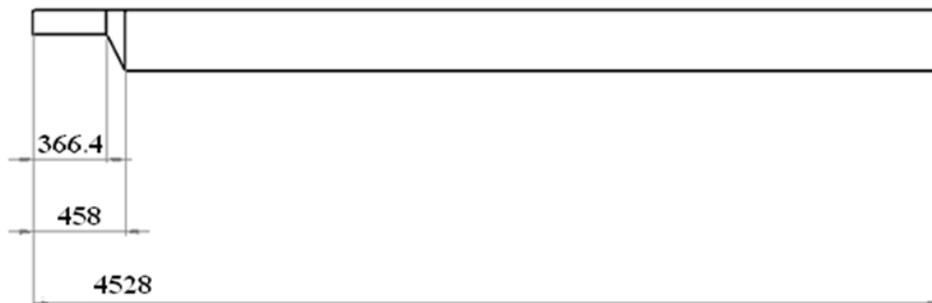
Technical Drawing of the Bo-105 Helicopter Blade (Dimensions are in mm).
